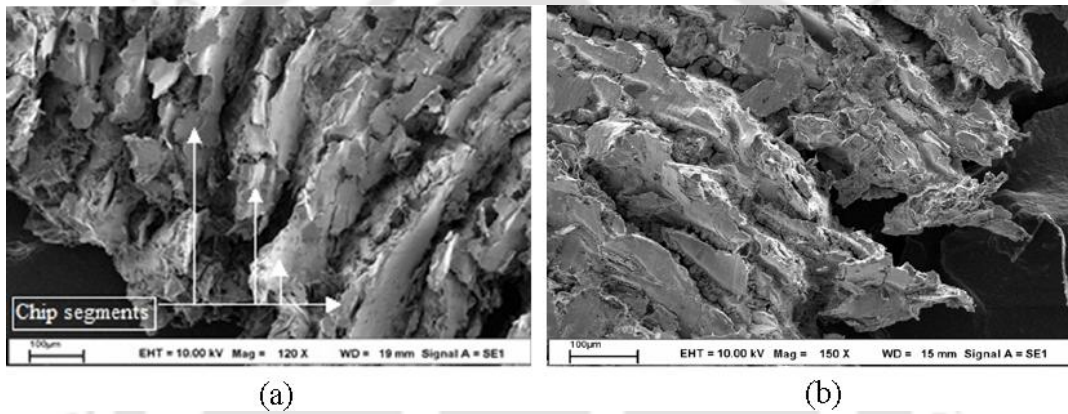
Free surface of the generated chip (a) From the front cutting tool (0.24 mm/rev feed and 1 mm depth of cut) and (b) From the rear cutting tool (0.24 mm/rev feed and 1 mm depth of cut)
